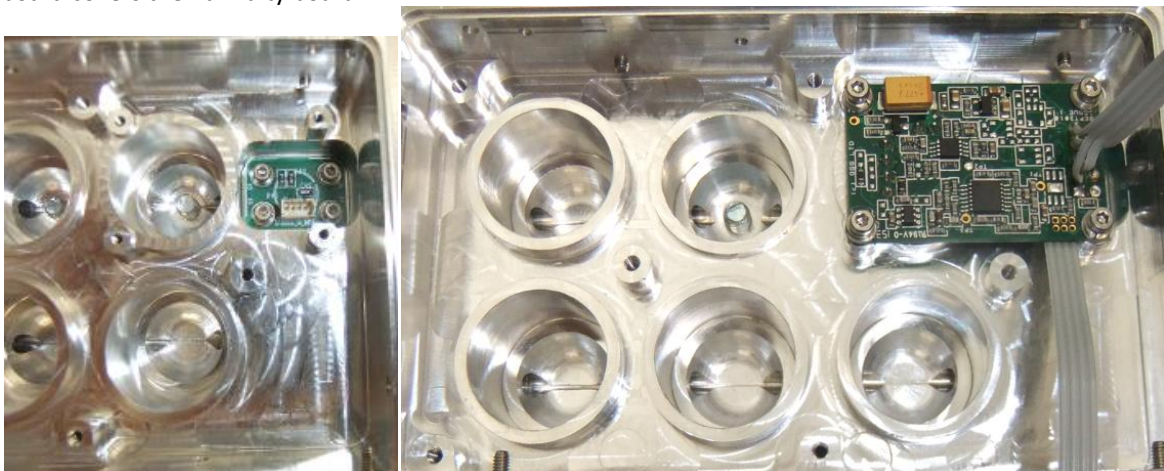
The humidity board installed (left) and the CO₂ sensor installed on top (right).
